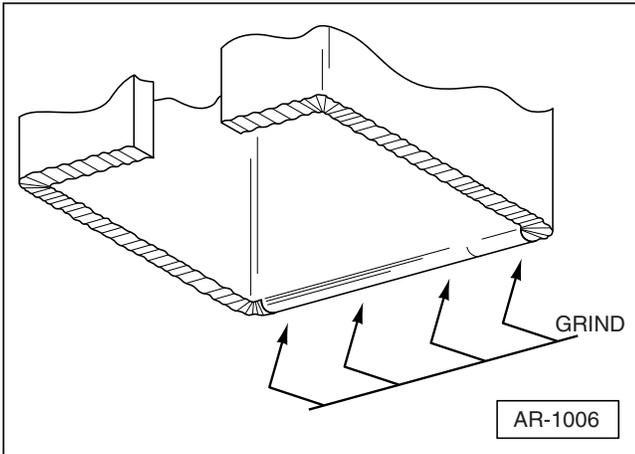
Grind the cut end of the columns smooth and radius the edges as shown.
